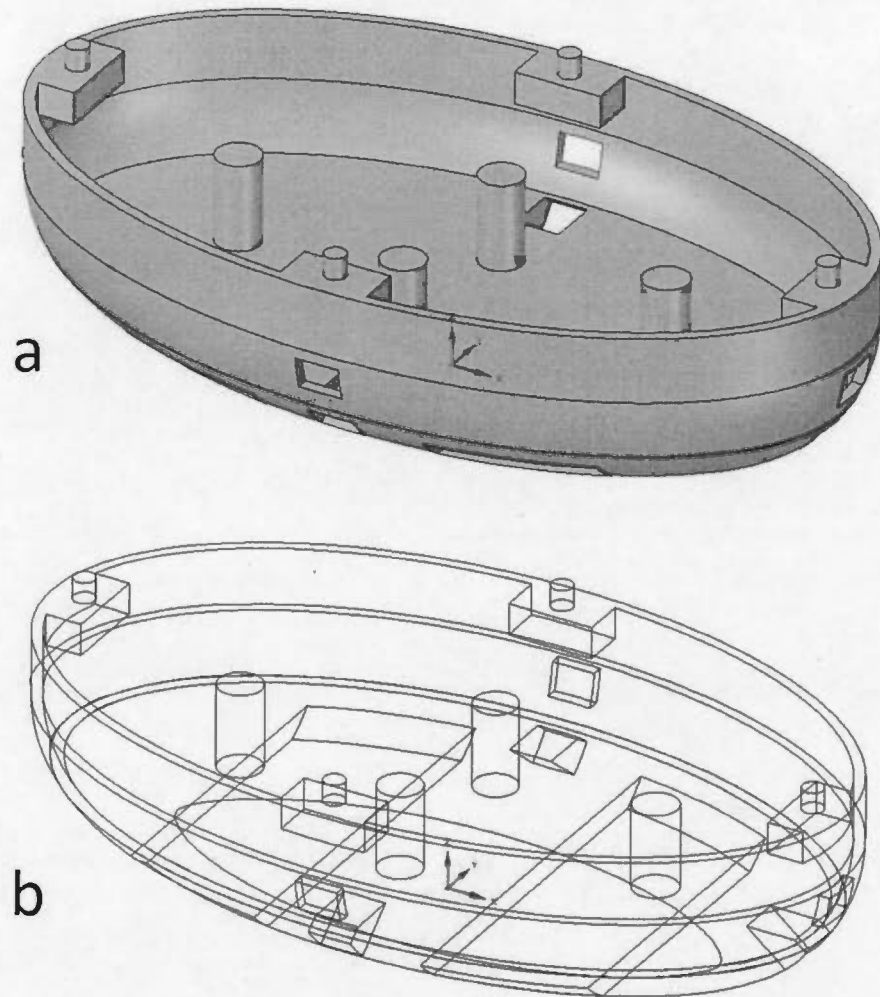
PAS sixth concept design bottom part 3D view. (a) Shady view. (b) Wired view
